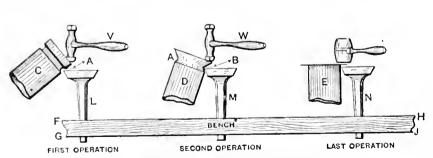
Method of Flanging the Round Pipe or Tube.
